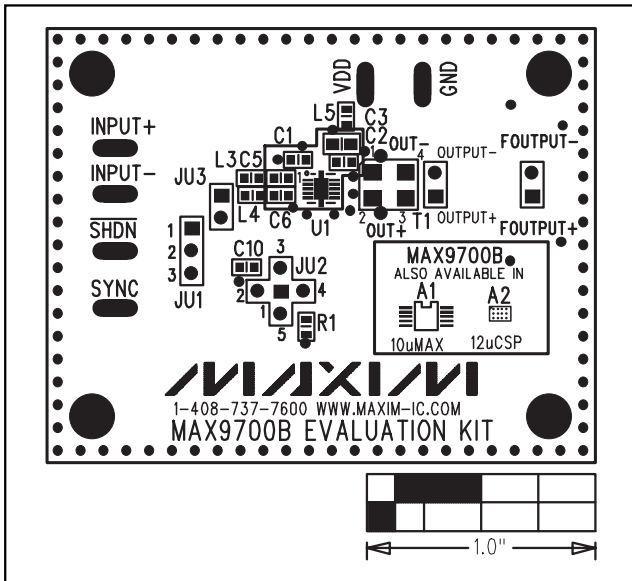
MAX9700B EV Kit Component Placement Guide—Component Side
